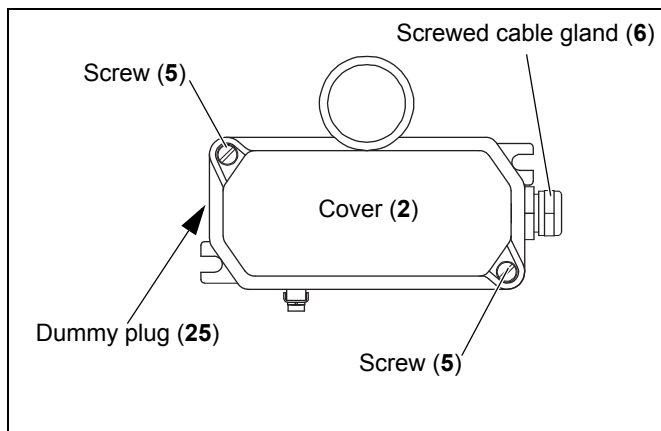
Mounting the belt misalignment switch onto the conveyor
